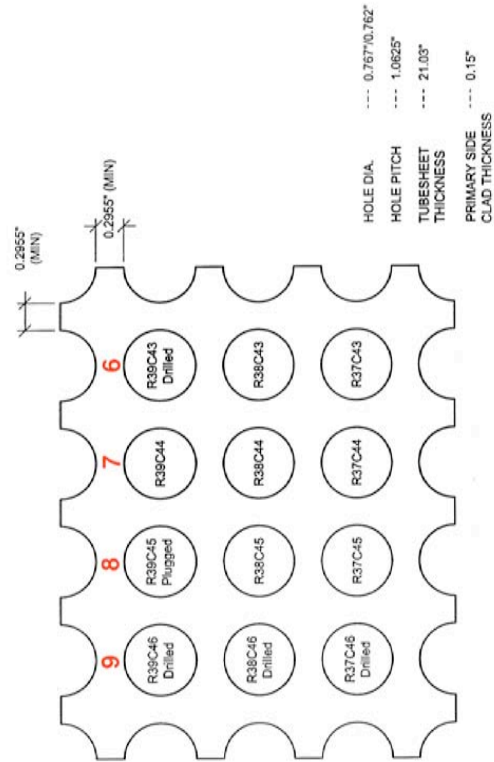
Tube sheet section TS1 removed from steam generator D (SGD) (4x3 array of 19-mm (3/4-in.) tubes).
